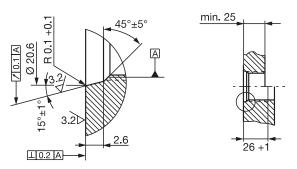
Mounting hole 3/4"-16UNF per SAE J475 O-ring 15.3x2.4
